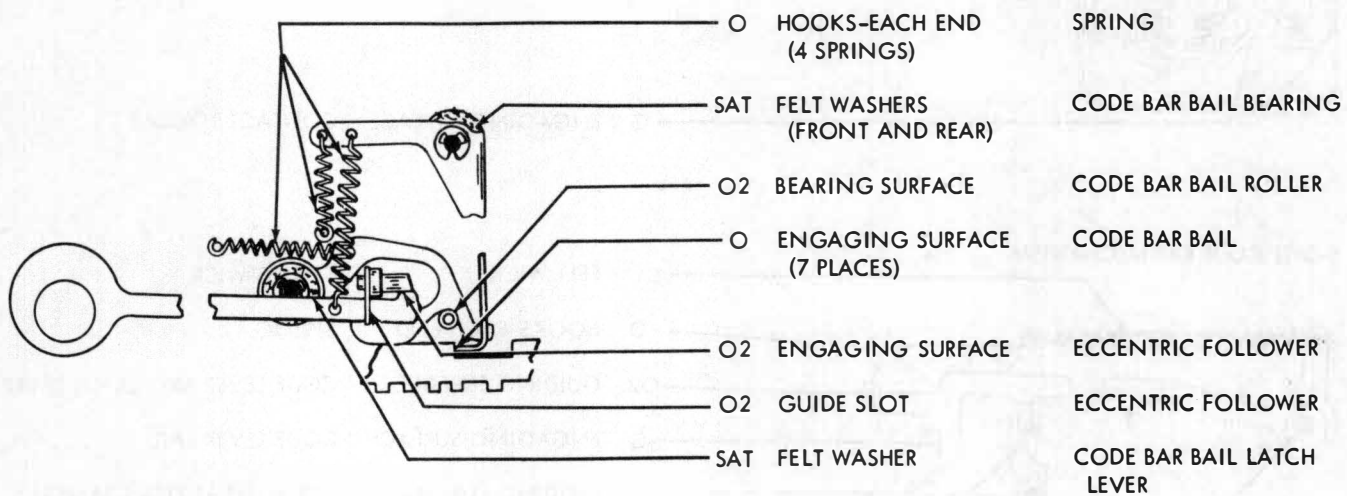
Keyboard Lubrication — Contact Box and Code Bar Mechanisms
